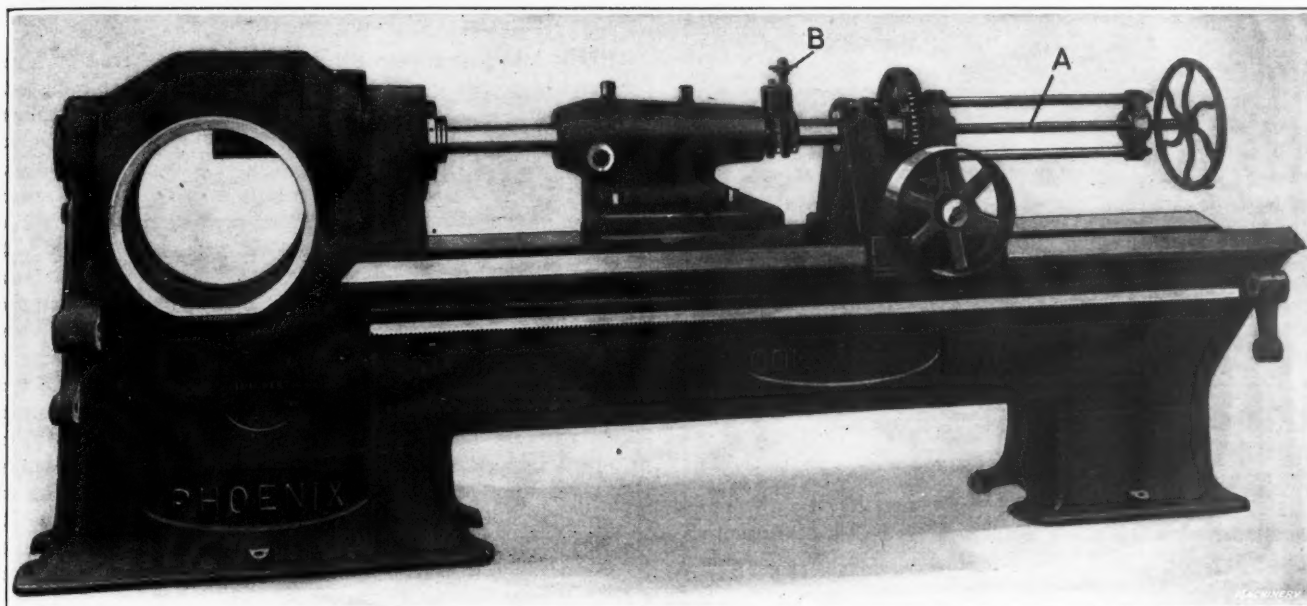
Equipment for boring and facing Tailstock Spindle Bearing—Illustration shows Performance of Facing Operation
